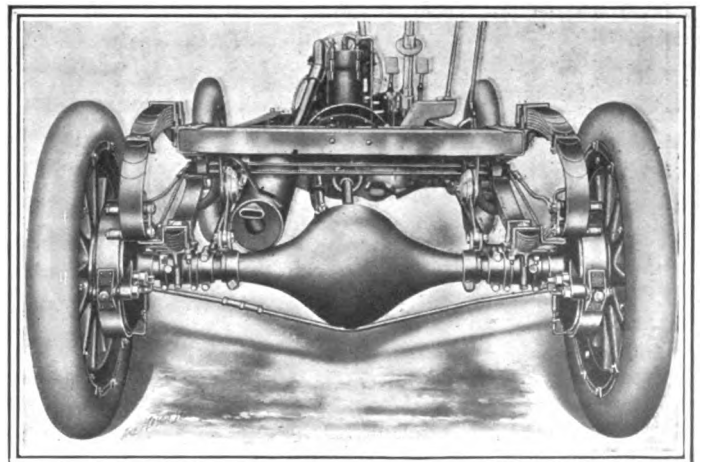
Rear view of chassis, showing the Knox rear axle construction
